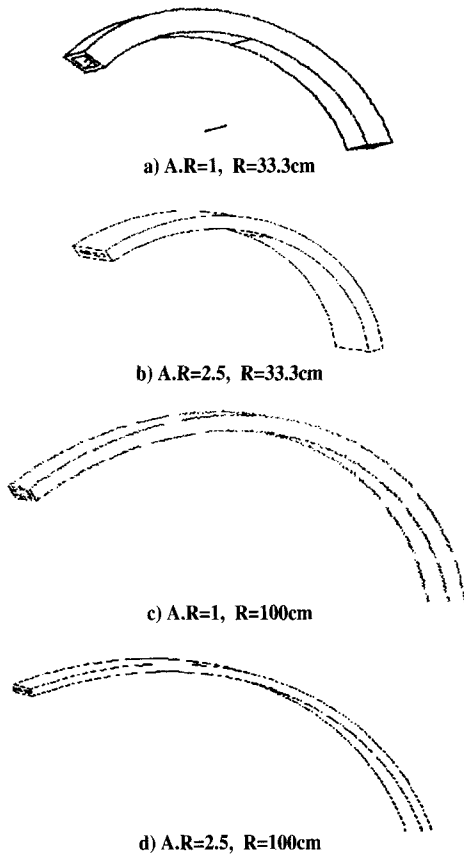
The curved rectangular hollow tube after the eccentric extrusion and bending process
